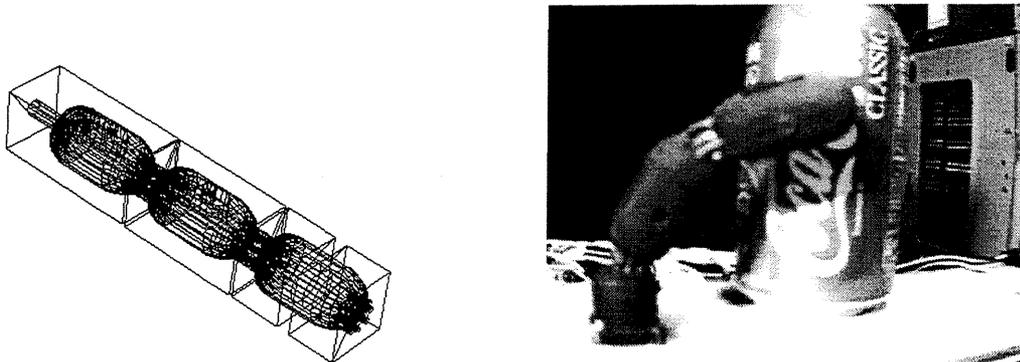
Dual-link robotic manipulator made on the prototype Genie fabricator at Ennex Fabrication Technologies. Left: CAD design; right: photograph of fabricated manipulator.
